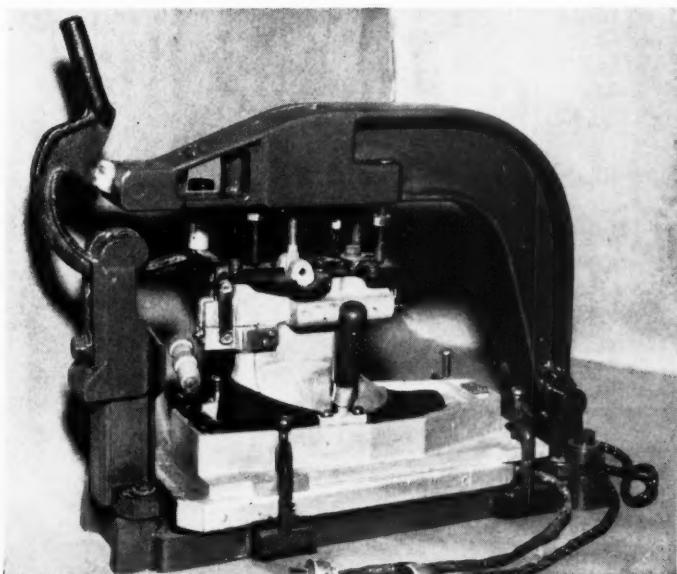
Wellco Shoe Corp. internal pressure machine showing locking device (handle, top left) and shoe in mold
